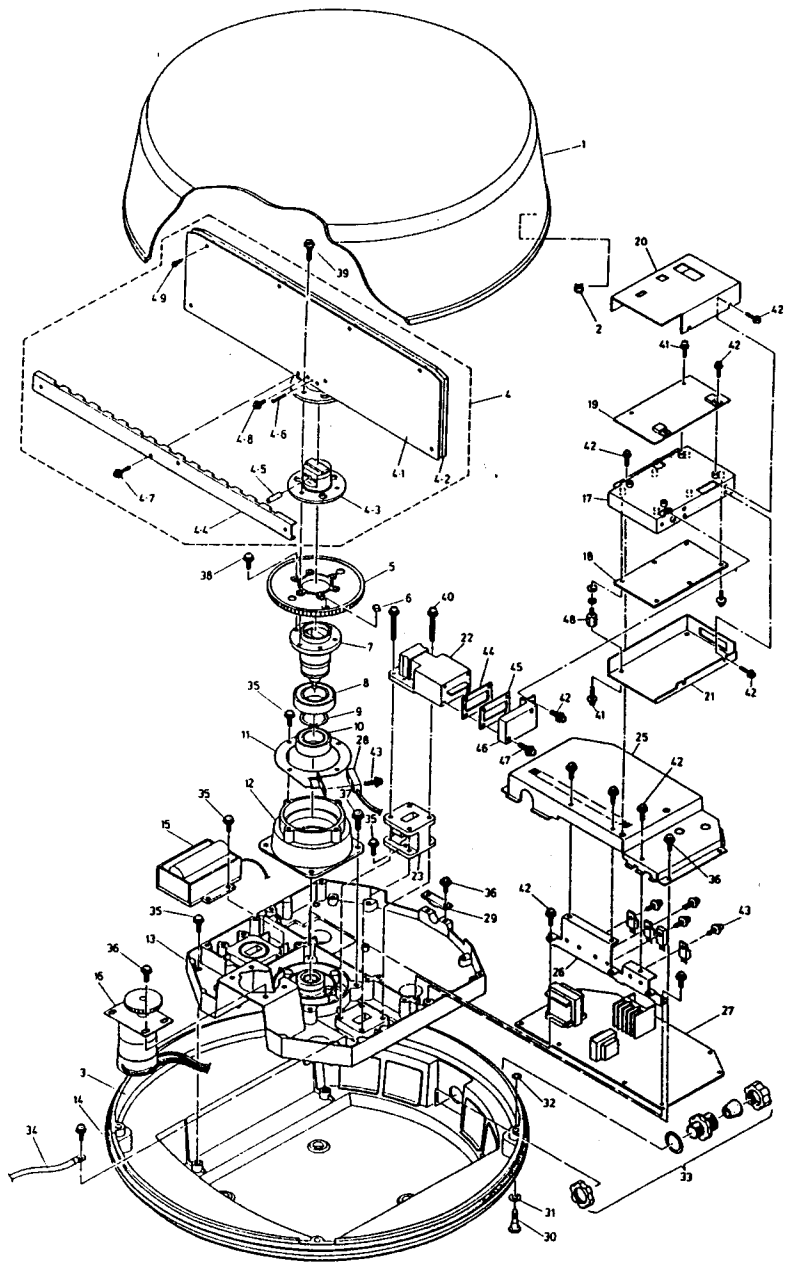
ASSEMBLY DRAWING OF R10X RADOME SCANNER UNIT
